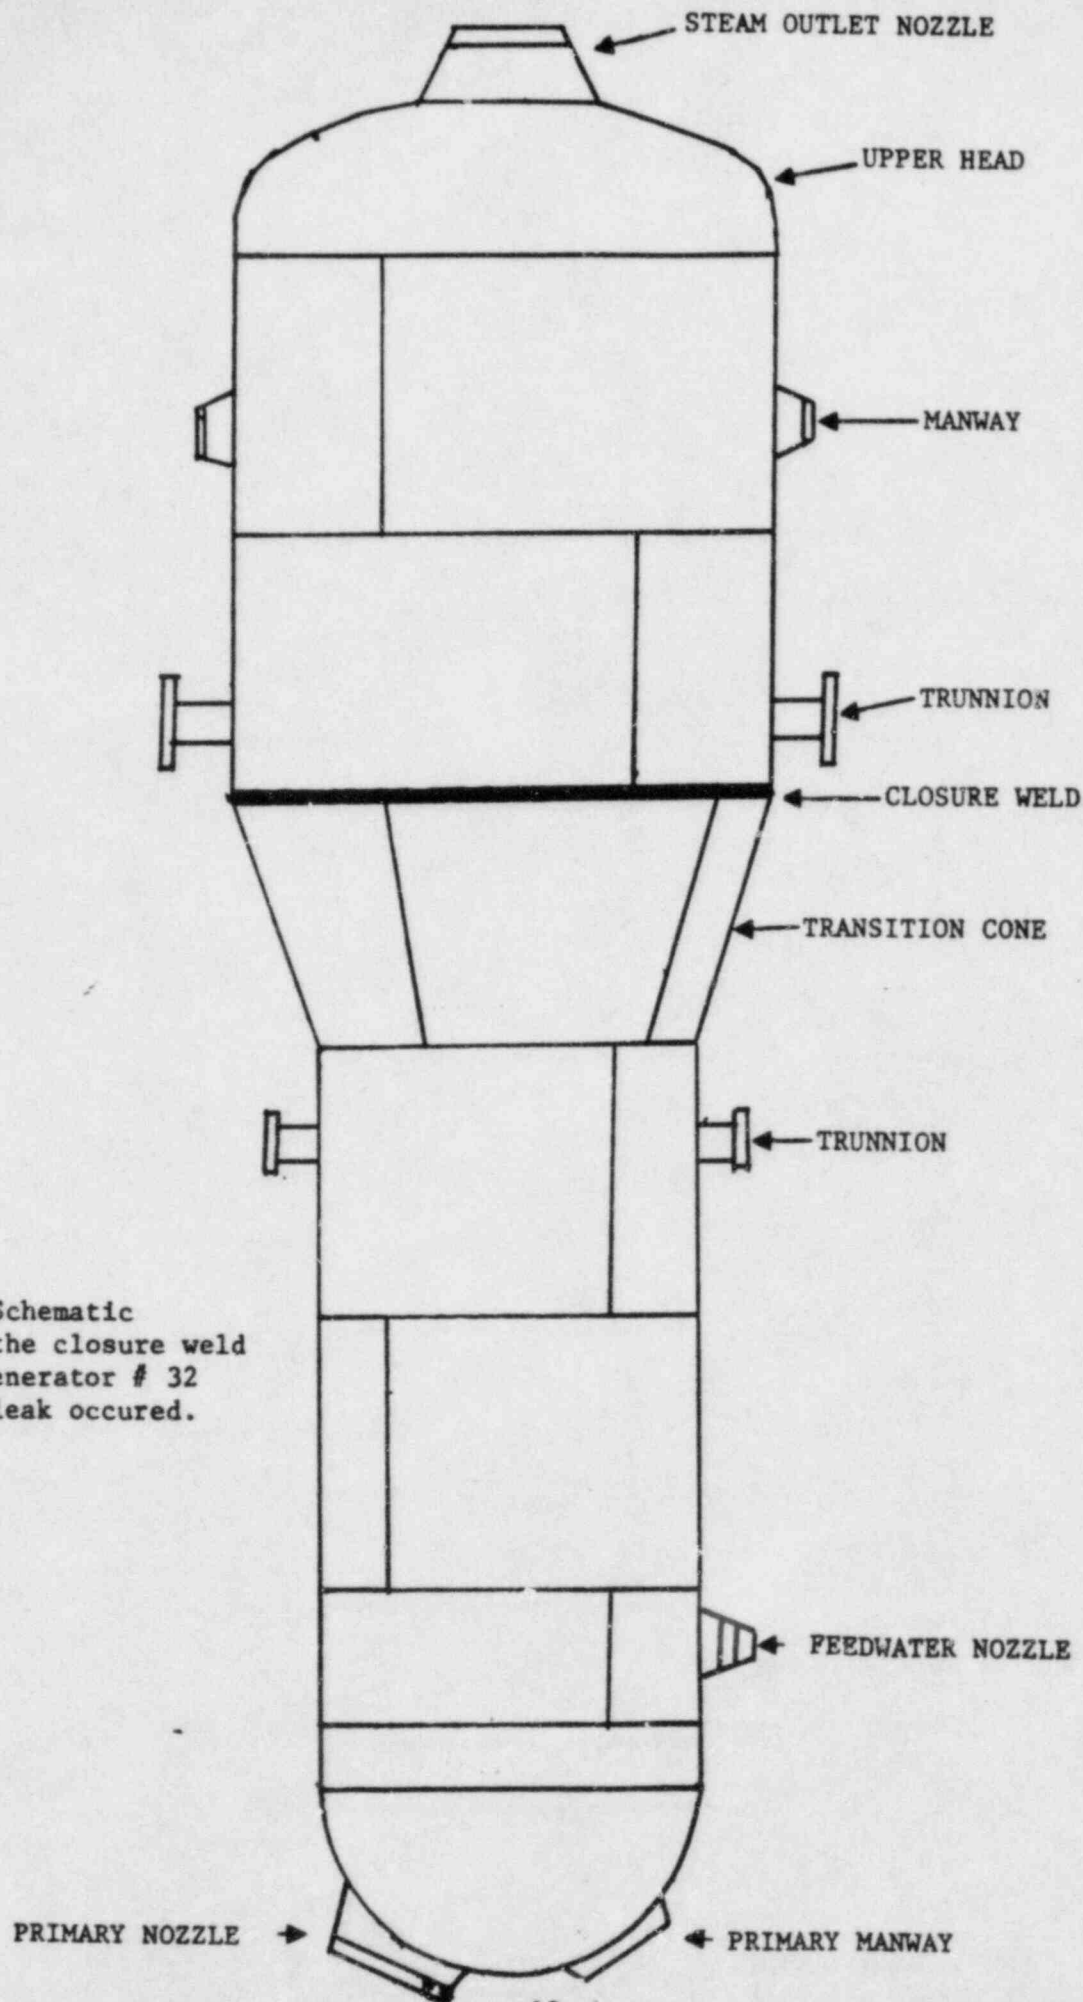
Schematic depicting the closure weld of Steam Generator # 32 where the leak occurred.
